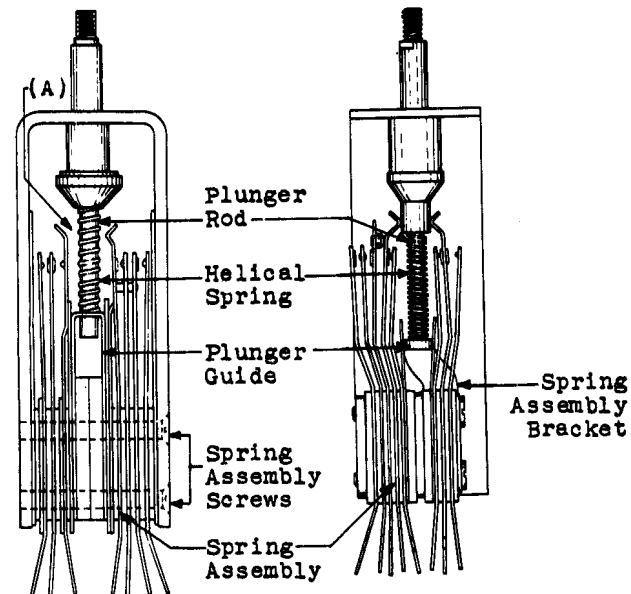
1-, 6-, 8-, and 9-type Key Units
